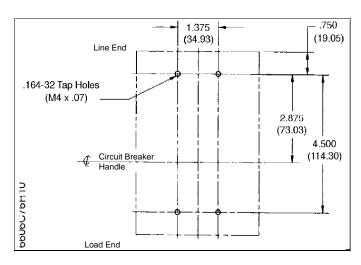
Circuit Breaker Mounting Bolt Drilling Plan
